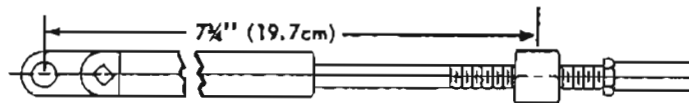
Center Line to Center Line Dimension 7-3/4" - Stern Drive Unit Shift Cable
